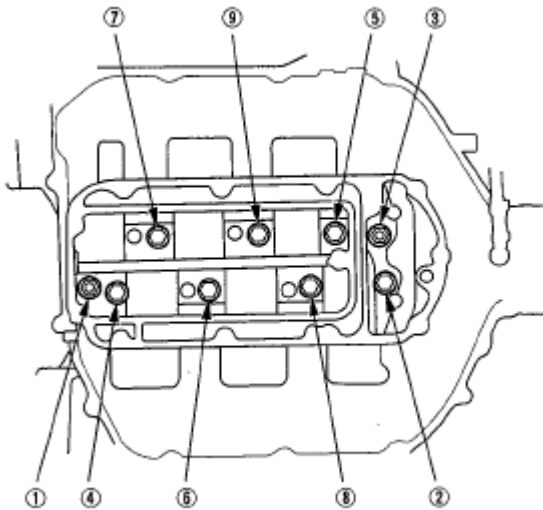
Identifying Intake Manifold Mounting Bolts And Nuts
